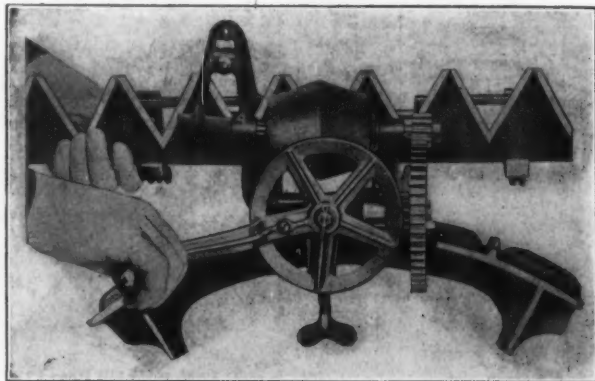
The Karbo Grinder Adapted for Mower Knives.
